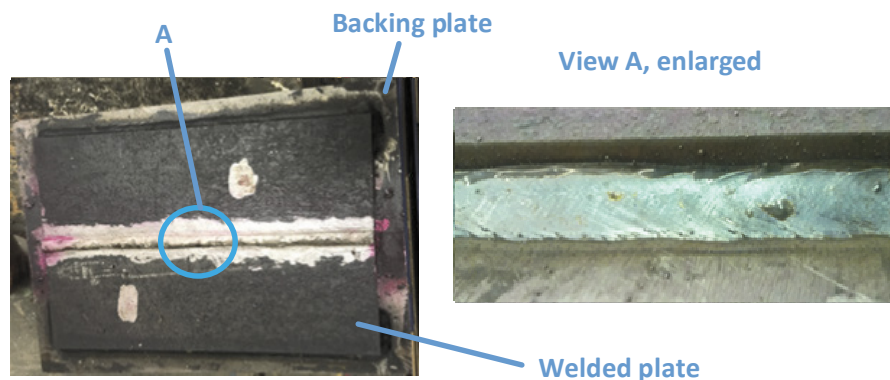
Color flaw detection of the butt weld in a rigid probe
